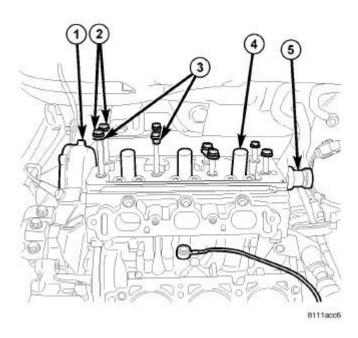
RIGHT CYLINDER HEAD Courtesy of CHRYSLER LLC
